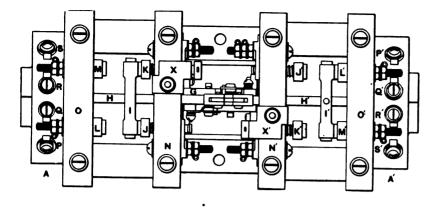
Electric Switch and Lock Movement with Countershaft Reduction Gear and Mechanical Clutch.
